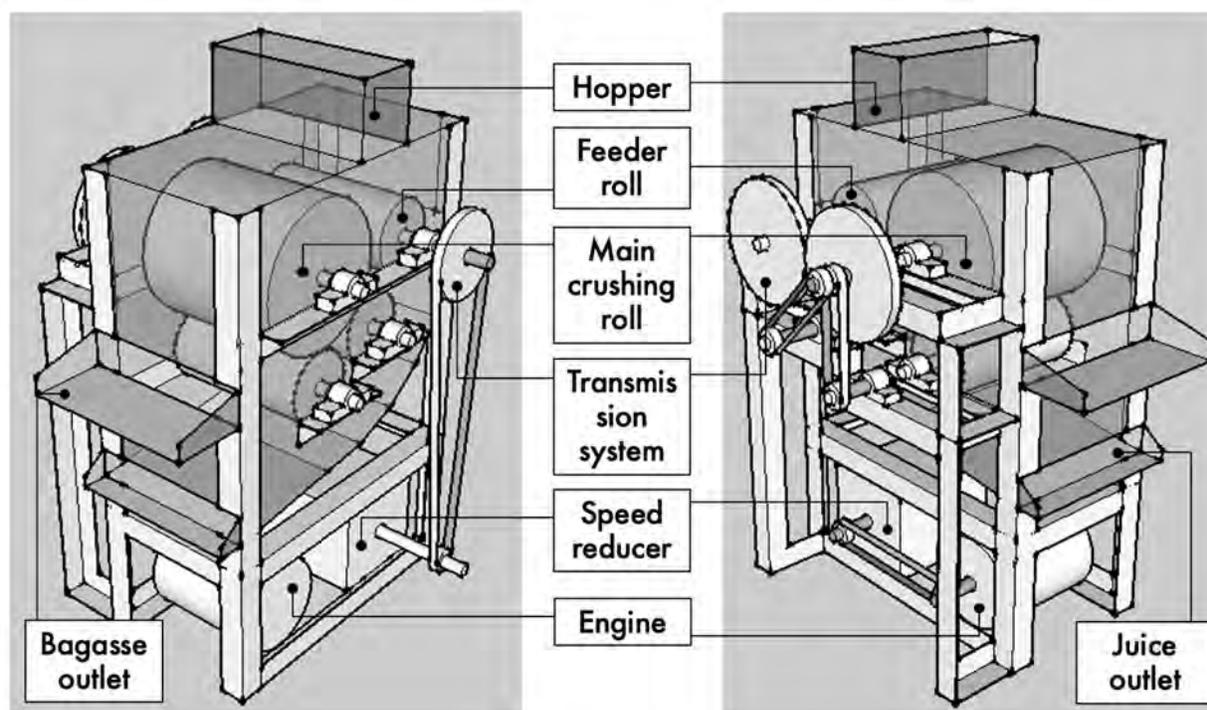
Schematic drawing of the juice extractor with major parts and components labeled accordingly
